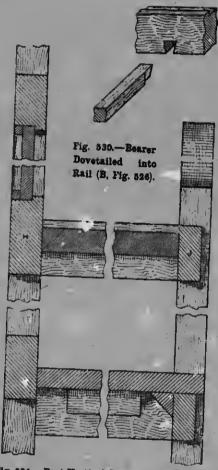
Part Vertical Section through Front and Back Frames of Hall Stand.
